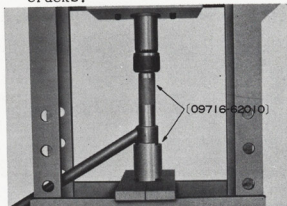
Lower Control Arm Bushing Replacer V1846
